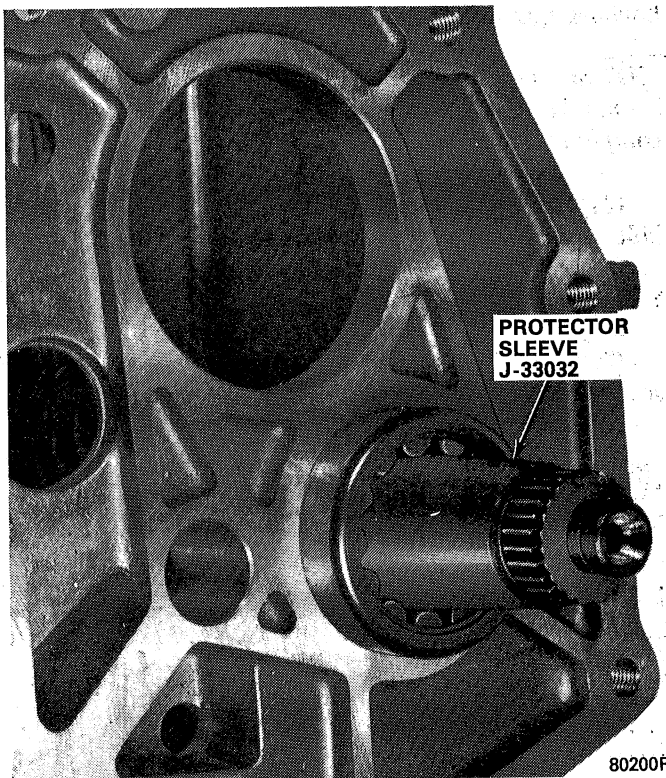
B-51 Rear Countershaft Bearing Sleeve Tool
